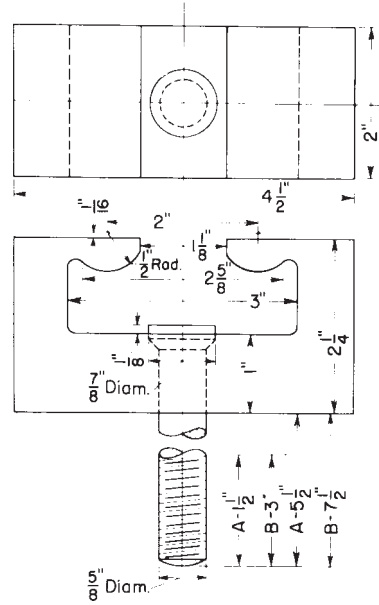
Tension-Perpendicular-to-Grain Test Assembly
